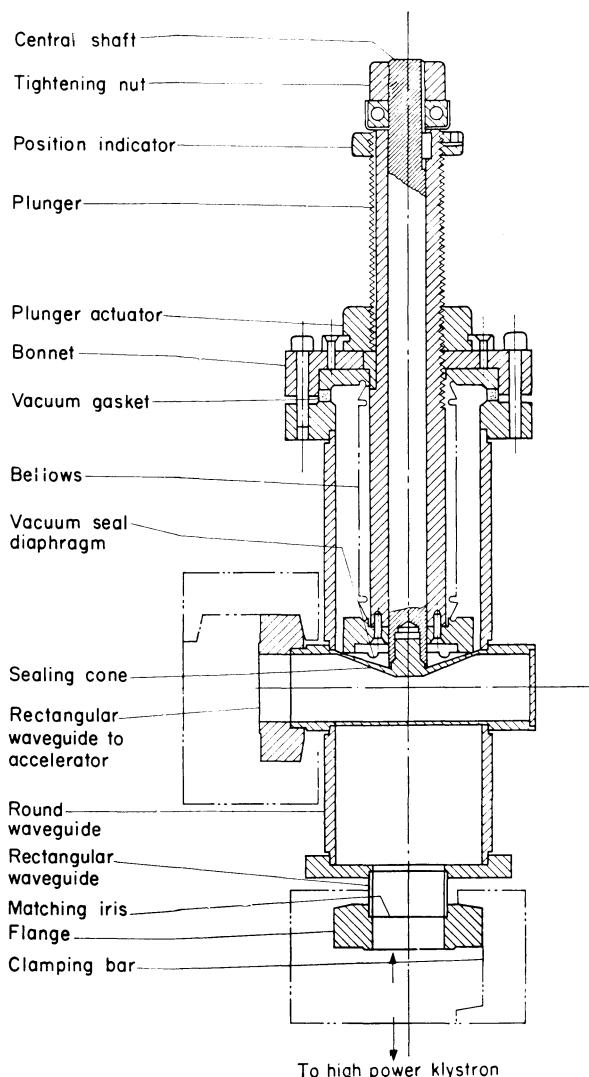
Valve assembly using the closing system from Fig. 6.74. Reproduced from Goertz¹⁵⁵ (Courtesy of Pergamon Press)
